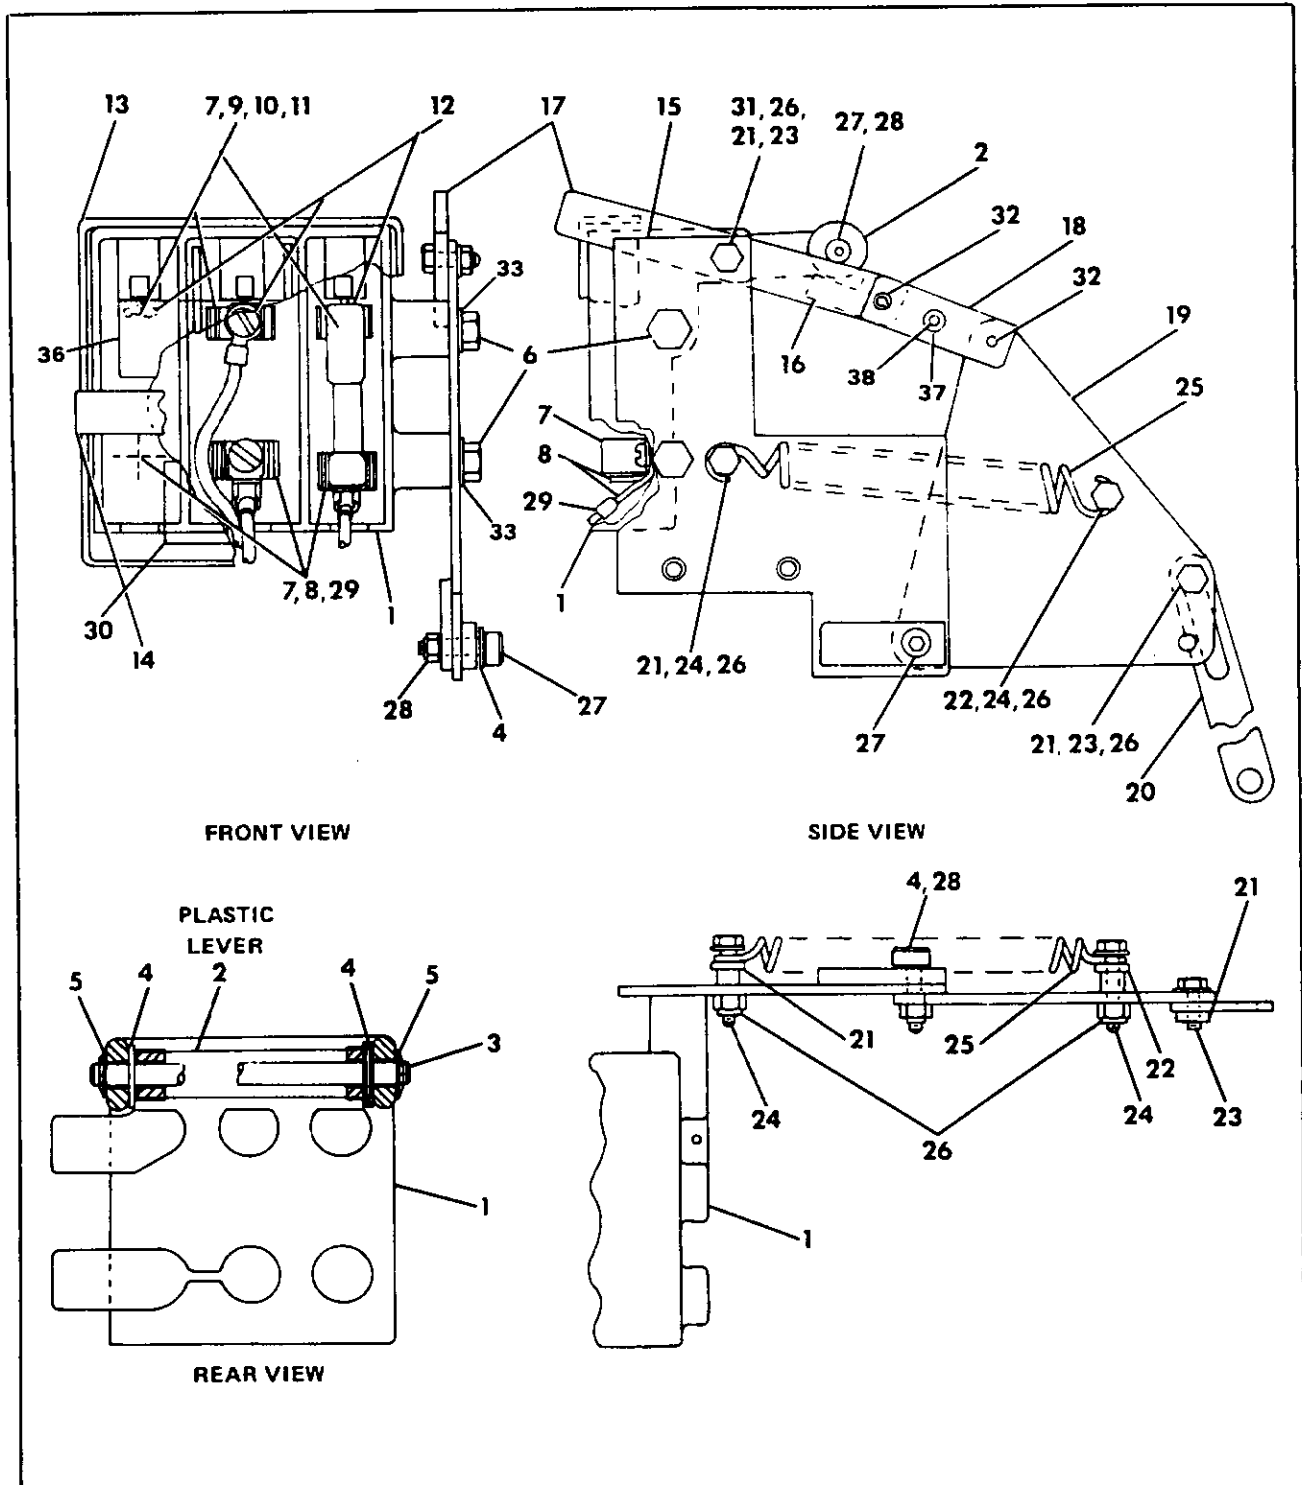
LAF-600B, LAF-800A and LAF-1600B Open Fuse Trip, Trigger Fuse Assembly
